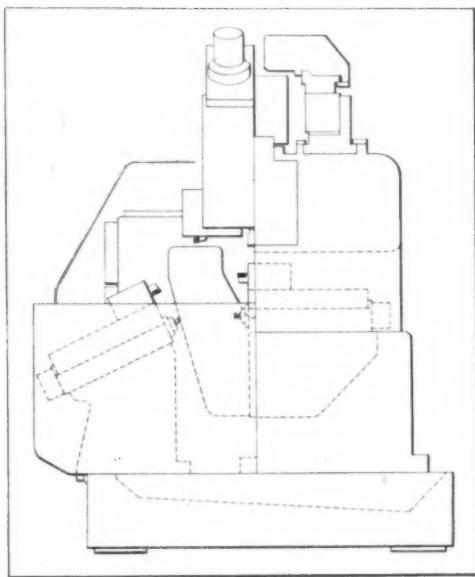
End View of the Churchill-Redman P5 Lathe Showing Rear Slide and Front Bed
